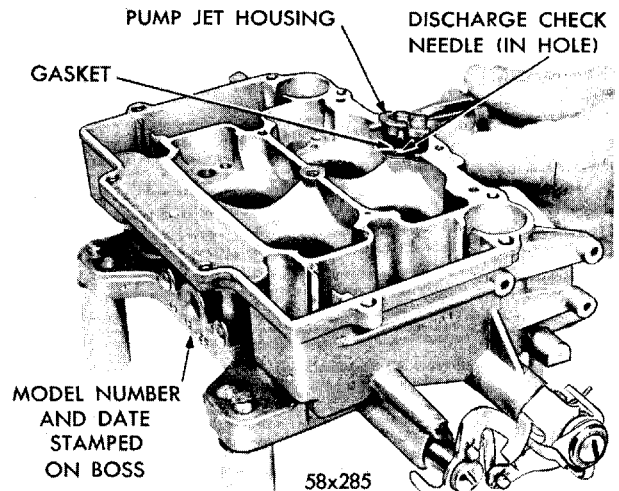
Removing or Installing Accelerator Pump Jet Housing
